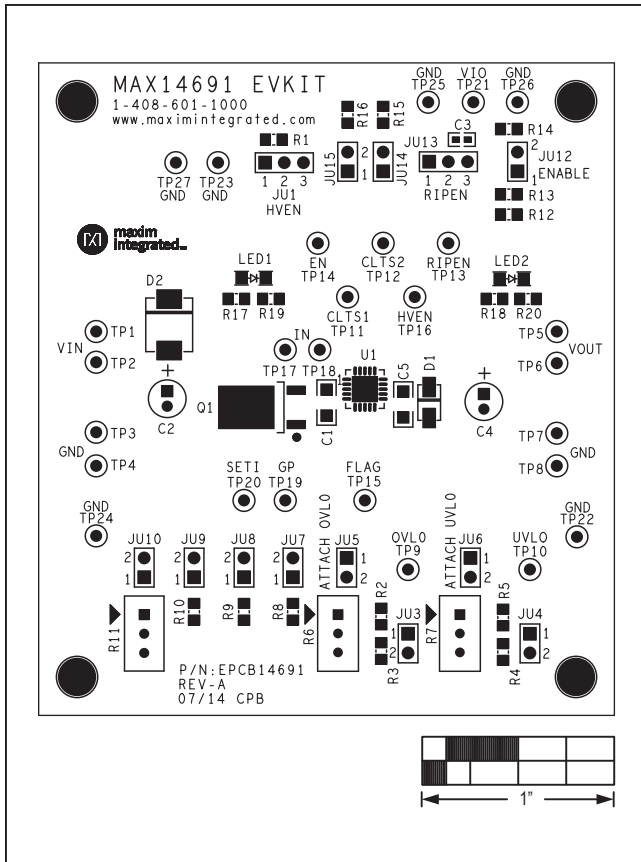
MAX14691 EV Kit Component Placement Guide—Component Side
